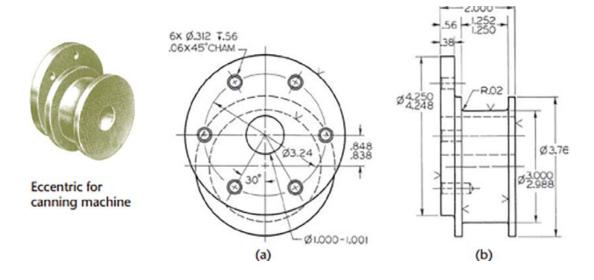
Dimensioning a Machine Part Composed of Cylindrical Shapes
